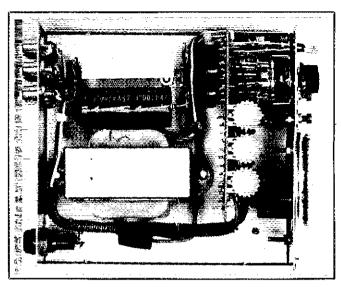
Top view of cabinet showing C1 and R14 mounted on tie strips next to the transformer.
